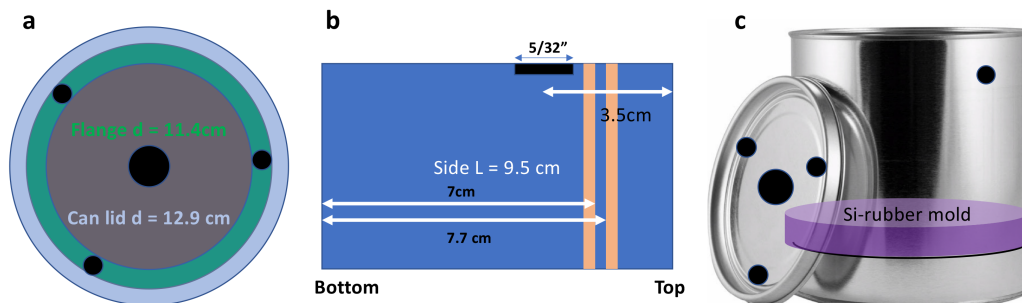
Mechanical drawing of the nitrogen jacket. (a) Top view of the can lid. The outer diameter of can and flange is 12.9 cm and 11.4 cm, respectively. (b) Side view of the paint can. The orange parts show where the vacuum flange is located. (c) A photo preview with illustrations. The black line shows where to cut the can with Dremels.
